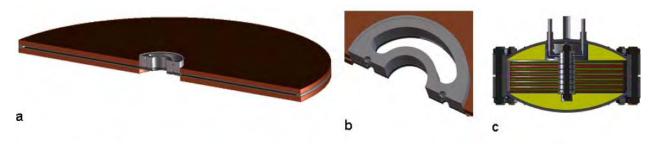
Design drawings of the sandwich plate - cross section of the sandwich plate + metal foam (a). Detail of the heat transfer channel (b). A single chemical heat pump reactor, consisting of six heat exchanger plates +foam, a diffuser for the entry and exit of the heat transfer medium and a shell (c)
